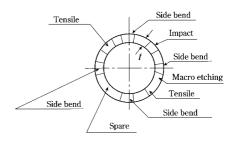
Welding Procedure Qualification Test Assemblies (Unit: *mm*)
